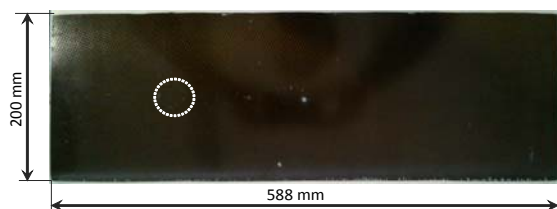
Dimensions of the test specimen. White circle indicates the location of a PTFE insert
